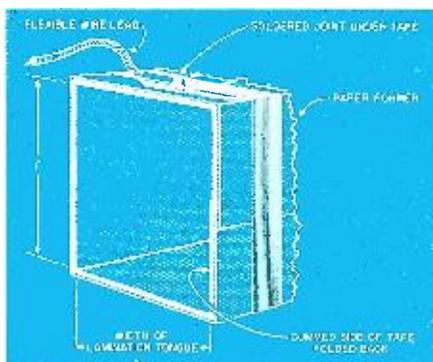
A flexible lead is soldered to one end of the primary winding and taped securely.
